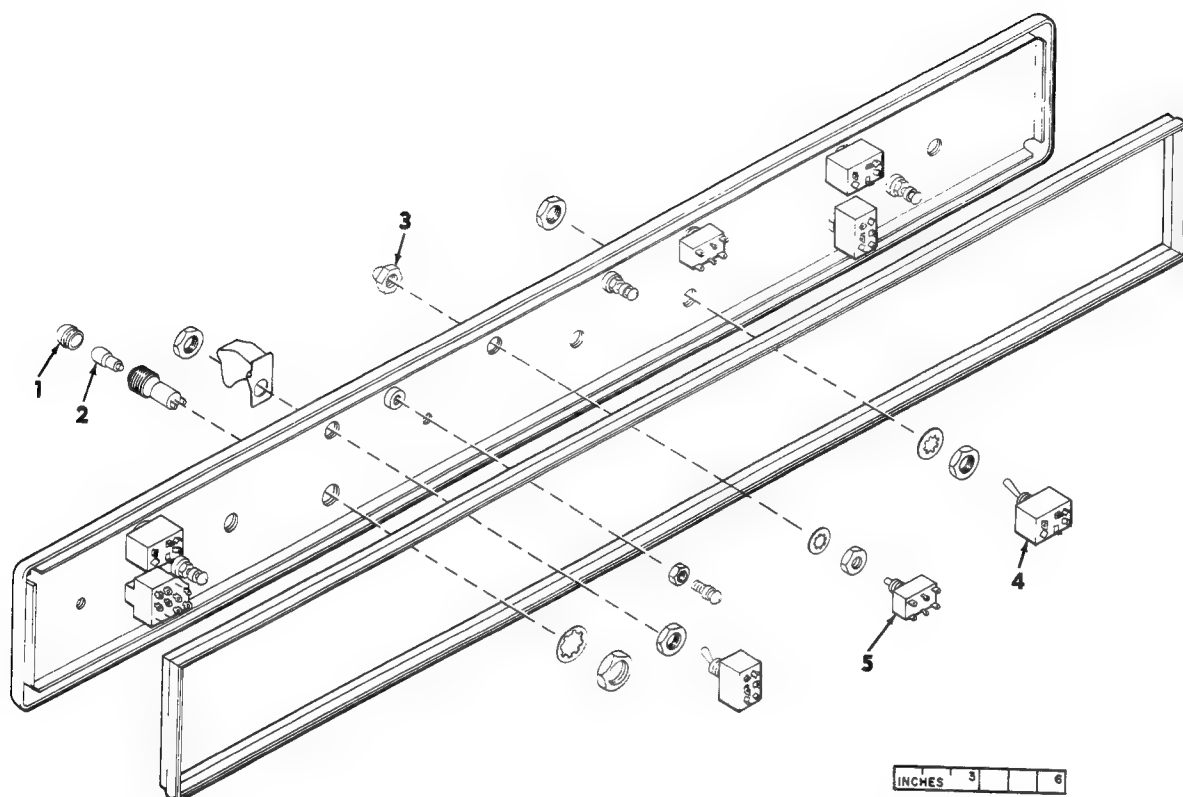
Control drawer, missile track (8511278)—partial exploded view
